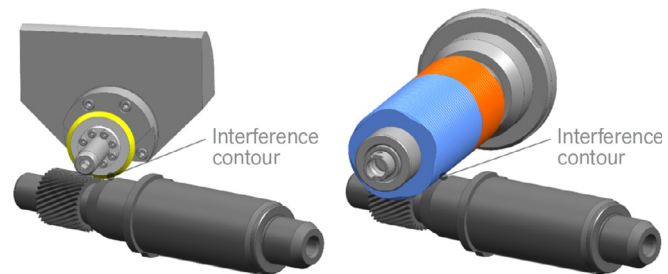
Finishing of a gear shaft of a hybrid transmission using (i) cBN profile grinding; (ii) generating grinding with combined worm for rough-grinding and grind-finishing (KAPP NILES GmbH & Co. KG).
